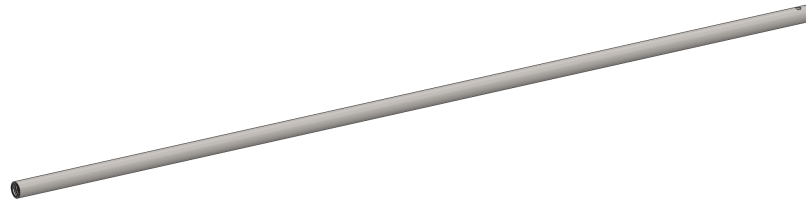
Shaft. M14 hole at the end for fastening ball joint.
